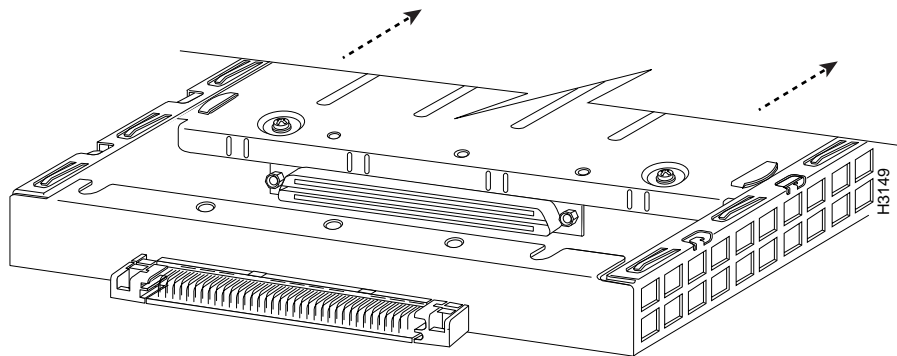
Location of Port Adapter Screw—Partial Port Adapter View
